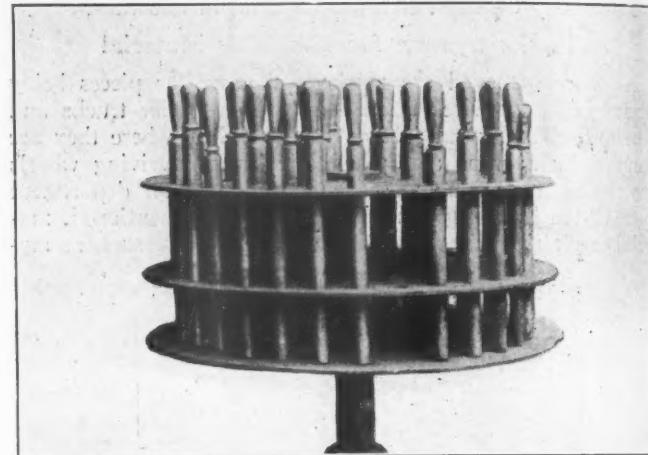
One of Several Sets of Taper Gage Plugs Used in the Erecting Shop
